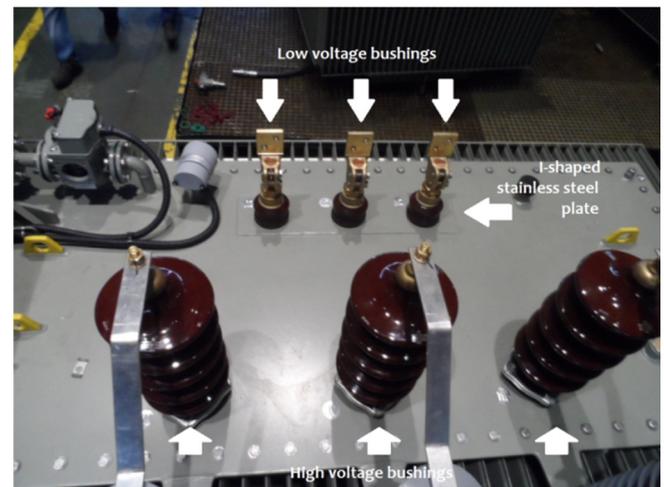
Top-plate of transformer tank with I-shaped stainless steel plate
